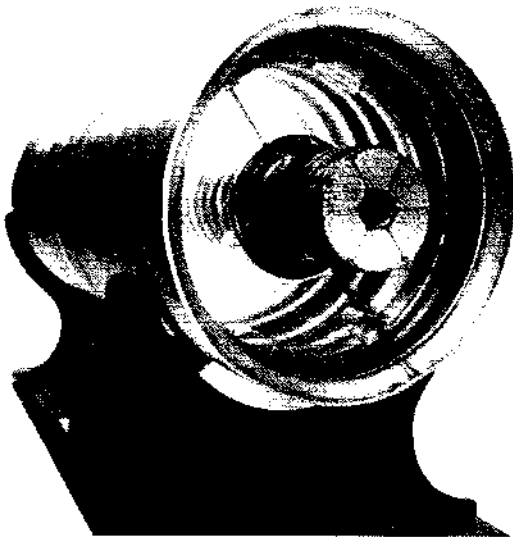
Corrugations create flexibility in a long cable section after enclosure has been wrapped around spacers and conductor and sealed with a continuous weld.
